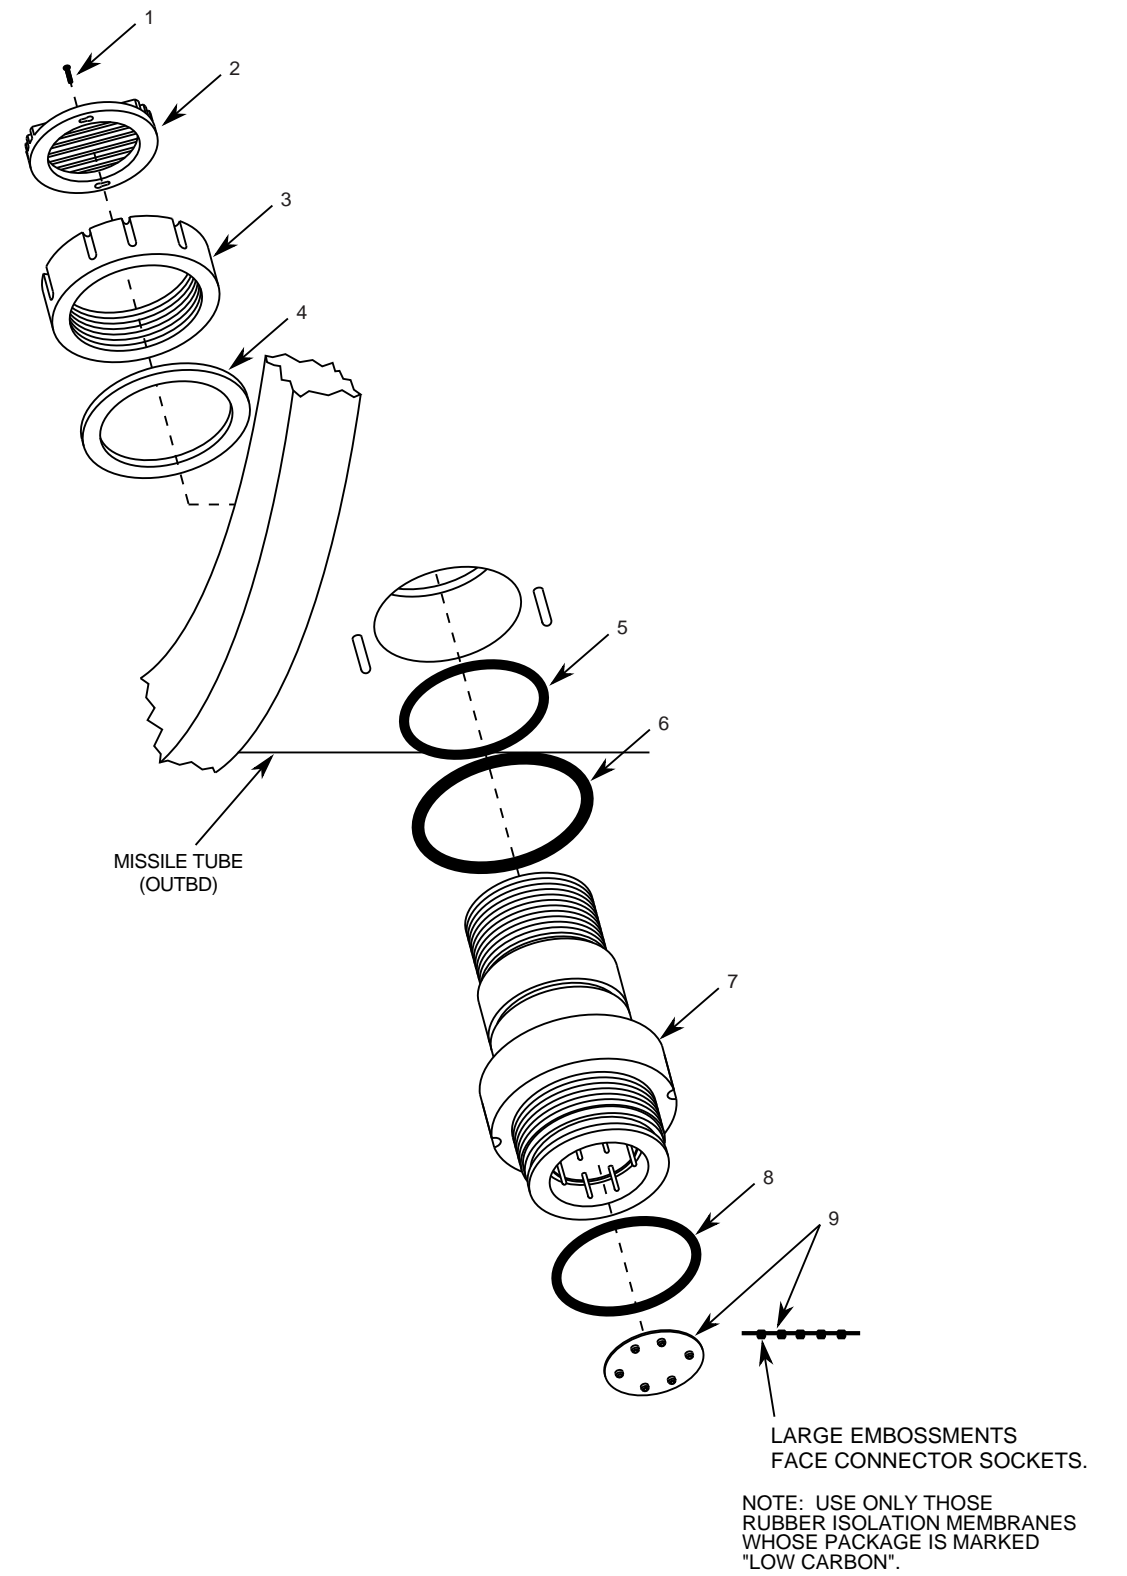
Environmental Monitoring Sensor Assembly
